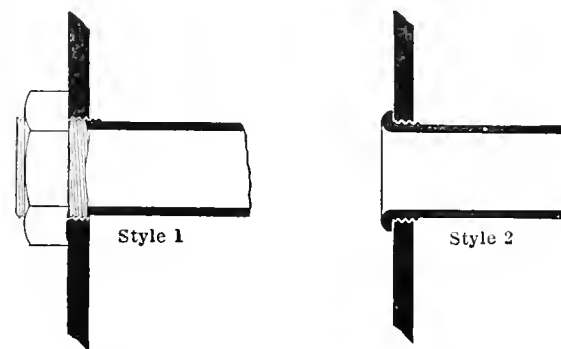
TWO METHODS OF FASTENING STAY-TUBES.
